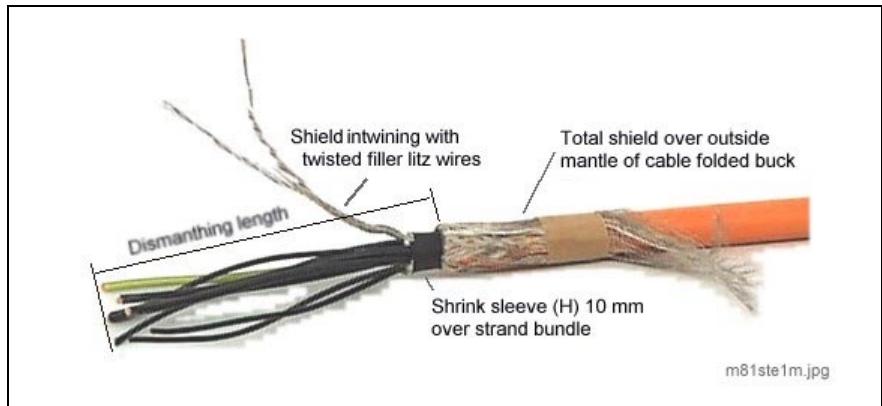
Making power cables for INS0381, -0382, -0386
